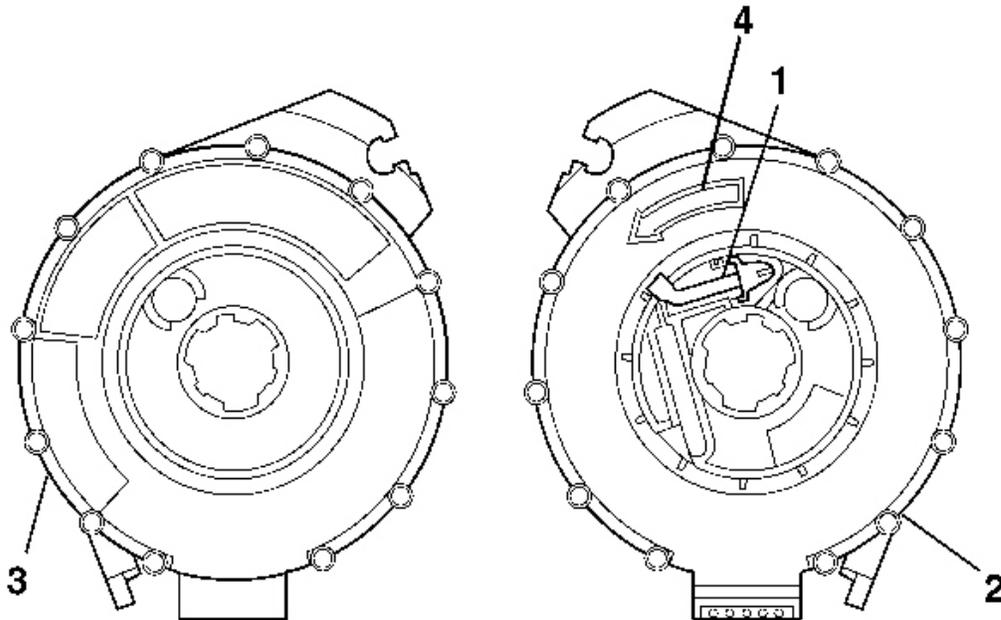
Centering SIR Coil (With Centering Window & Spring Service Lock)
